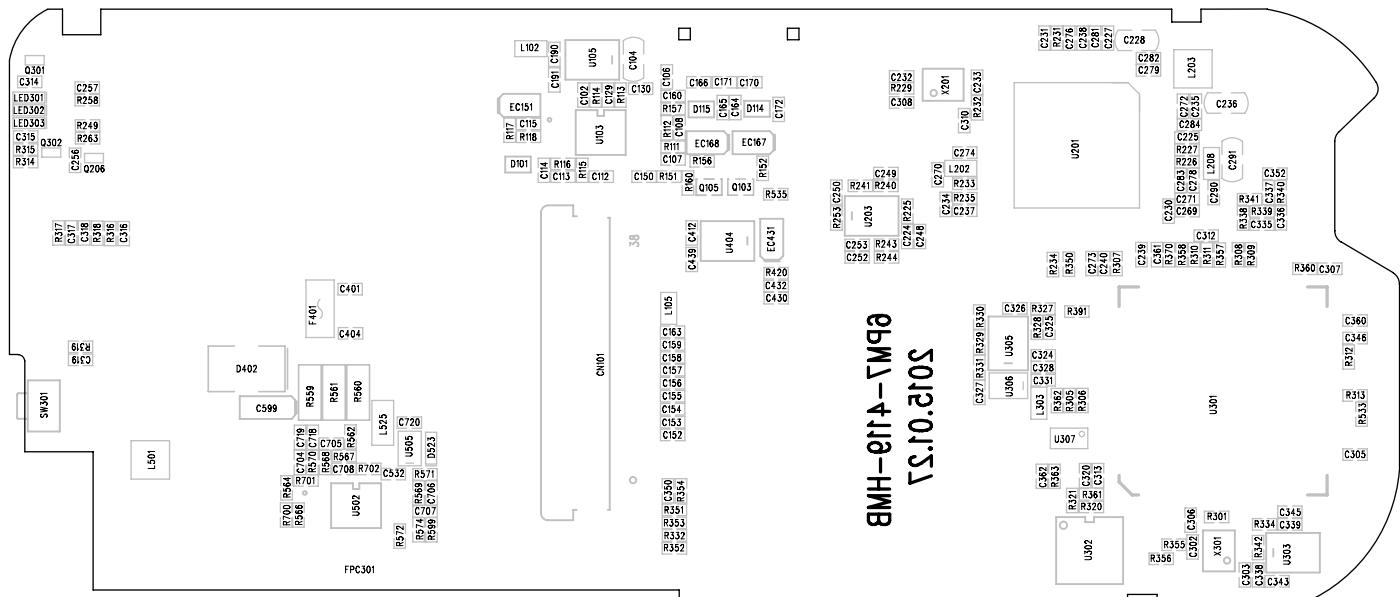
TP660 Main Board Top Side PCB View (400-470MHz)
